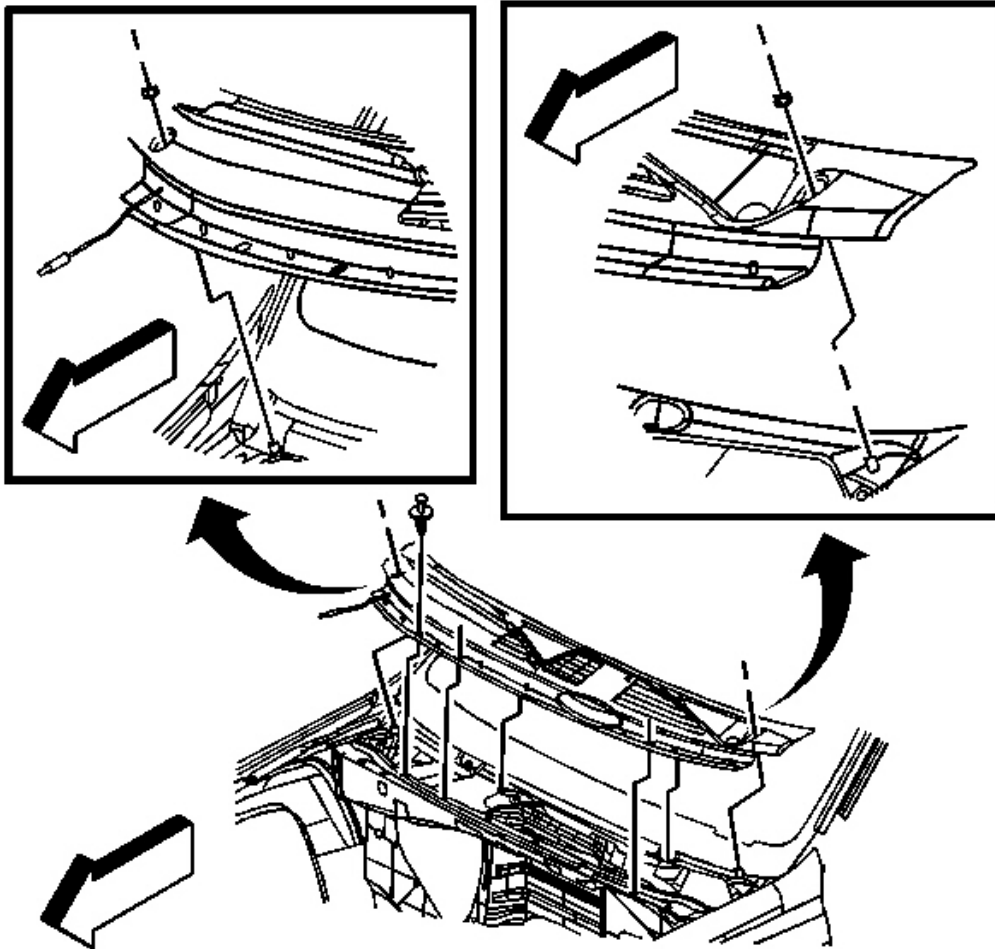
View Of Air Inlet Grille Panel & Push-Pin Retainers
